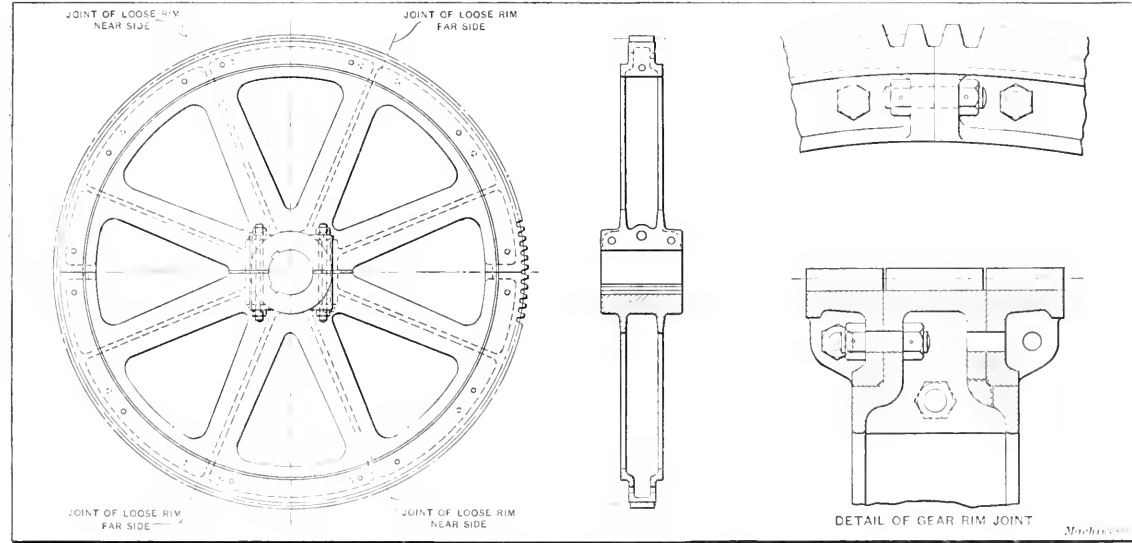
Large Triple Staggered Tooth Gear made by the Mesta Machine Co.
